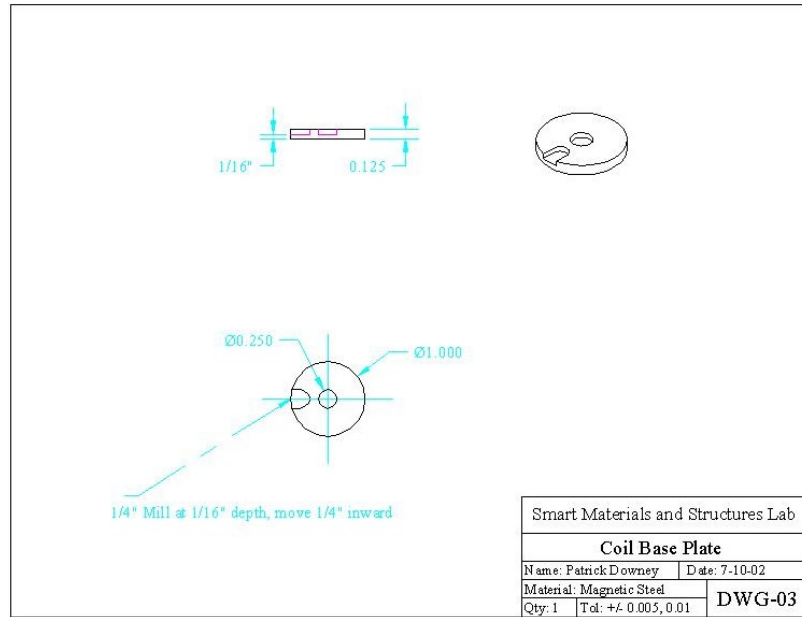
Mechanical drawing of a magnetic circuit steel piece.
